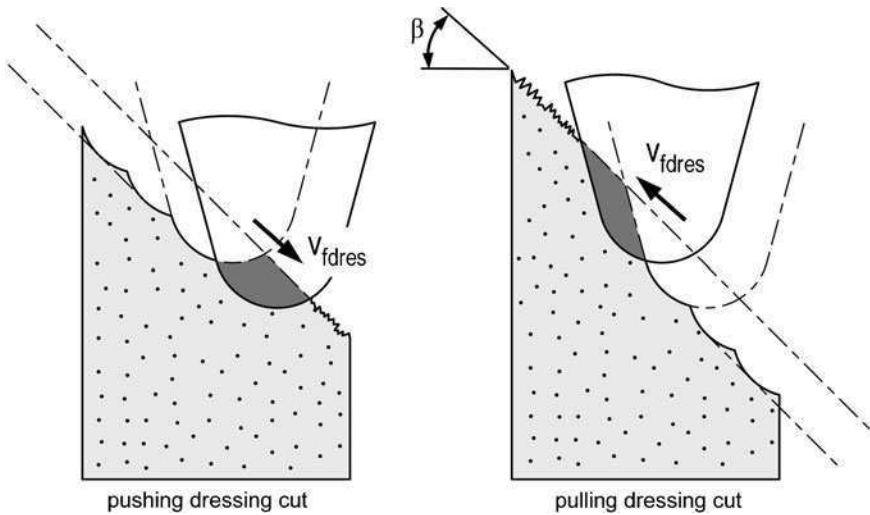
Kinematics of engagement in the pressing and drawing dressing cut [5]
